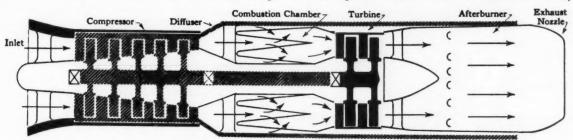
PLACE FOR TITANIUM is indicated in this jet engine cutaway. The cross-hatched section shows where the metal has been used or has been investigated—in compressor discs, compressor blades, compressor stators, bolts, compressor and turbine liners, and sheet metal parts. New alloys are expected to increase titanium's heat advantage over steel.
